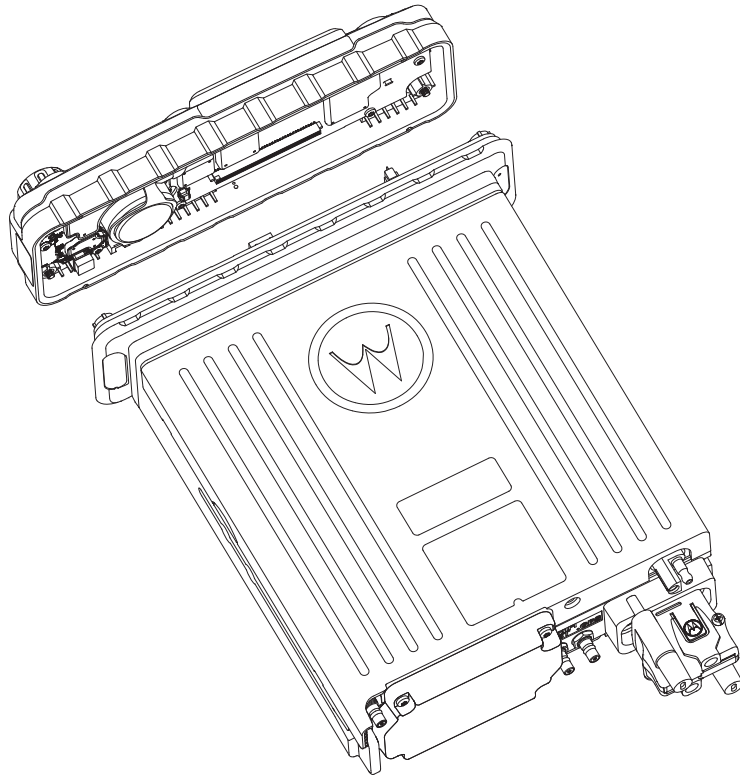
Disconnecting the Transceiver Flex from the Front Housing Assembly
